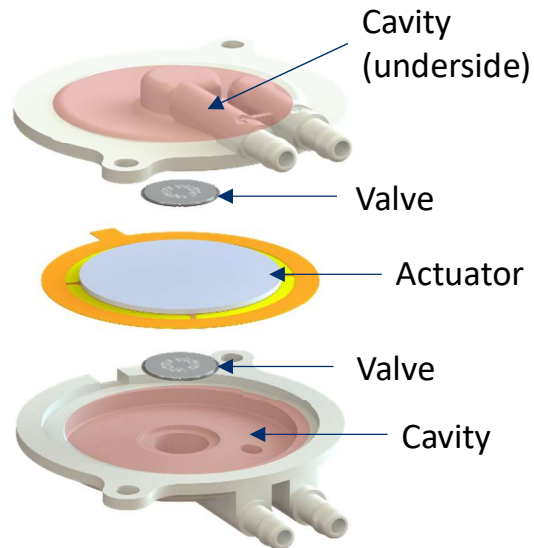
A piezoelectric disc pump – ‘exploded’ view
